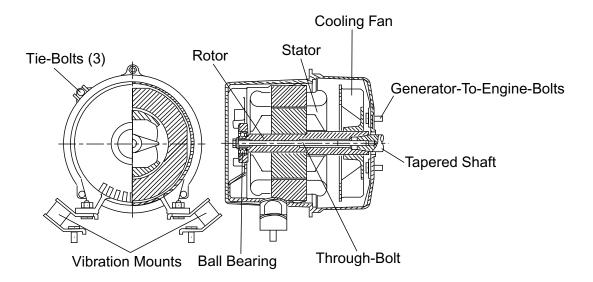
Cutaway of Generator (Model TPG-2900H-DX Shown)
